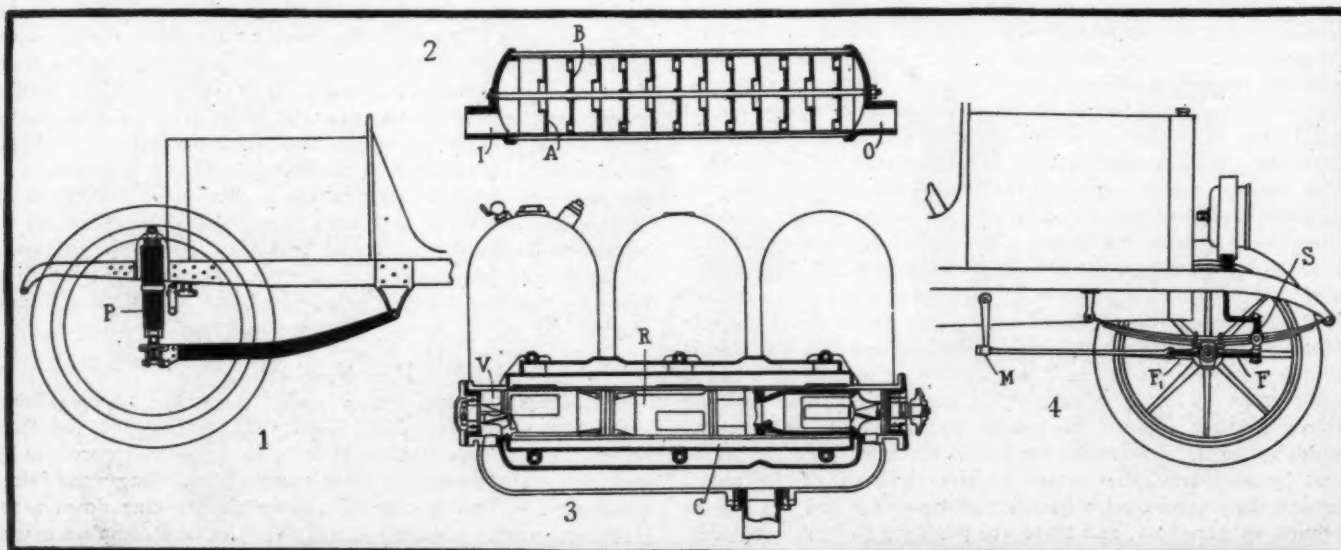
Liebau spring vehicle. Fig. 2—Swain muffler. Fig. 3—Coles-Charavay rotary valve motor. Fig. 4—Lowe dirigible headlights
